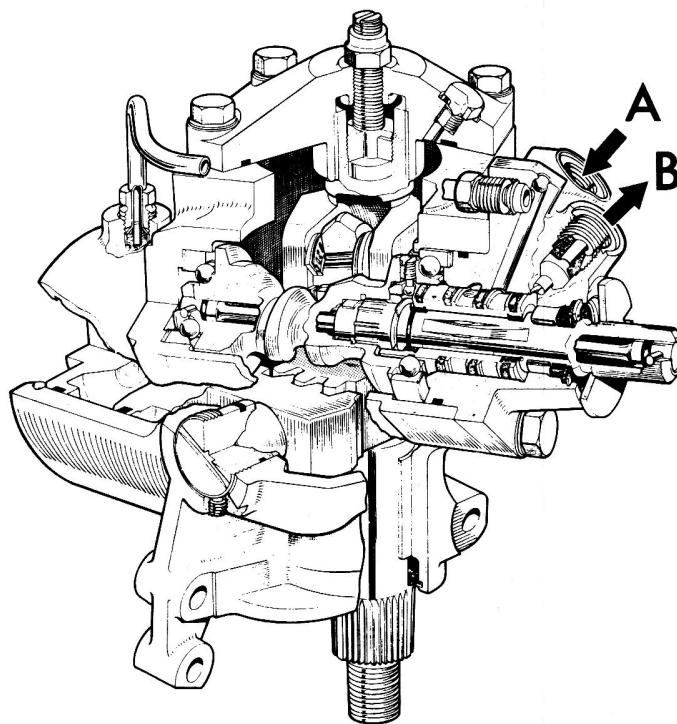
Sectioned view of the Adwest power assisted steering box. 'A' high pressure and 'B' low pressure connections
